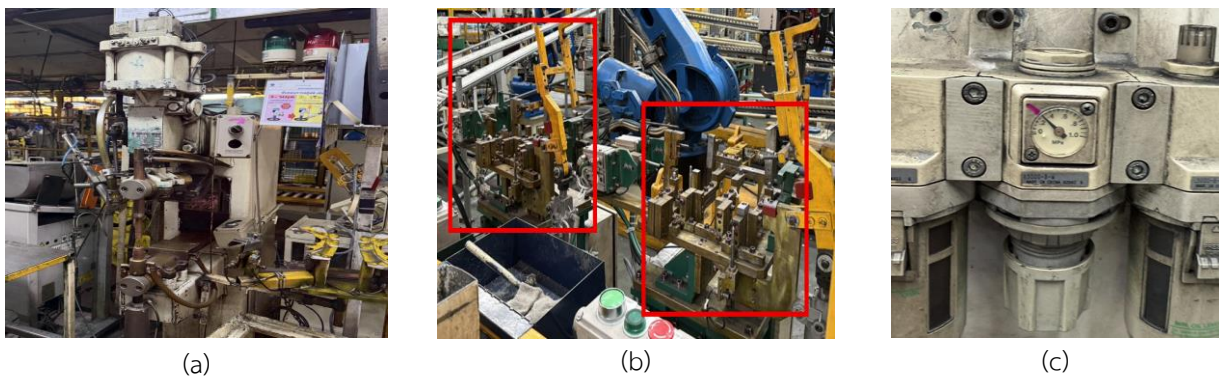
Support battery departments. (a) Stationary spot welding. (b) Jig. (c) Air regulator.
